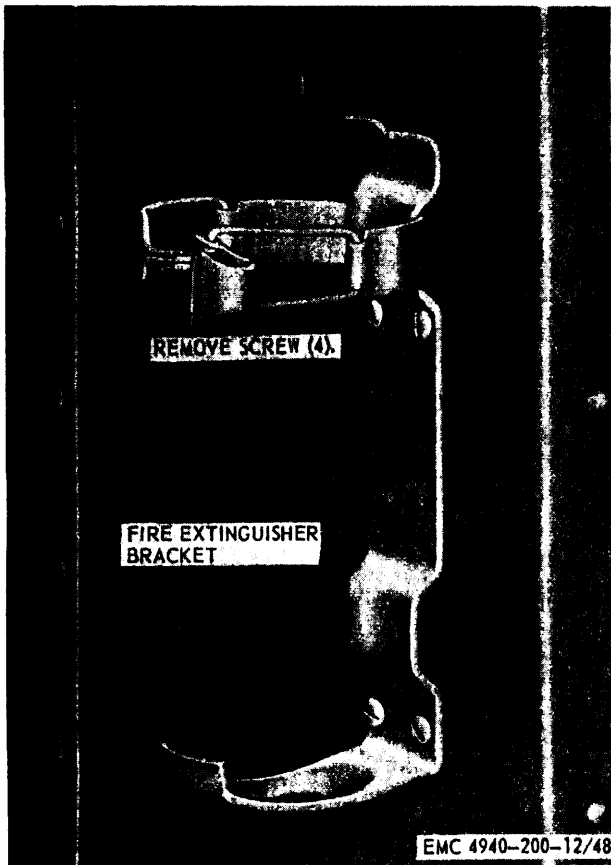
Fire extinguisher back-et, Model SECM, removal and installation.
